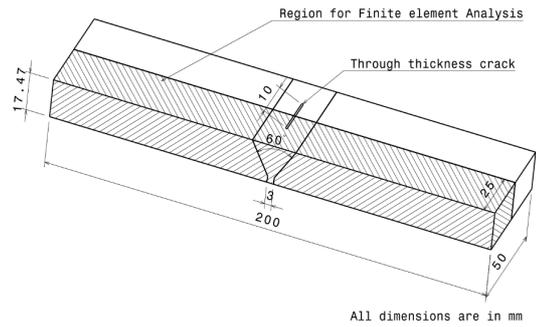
Geometry of single v-joint plate with crack at center of weld bead.
